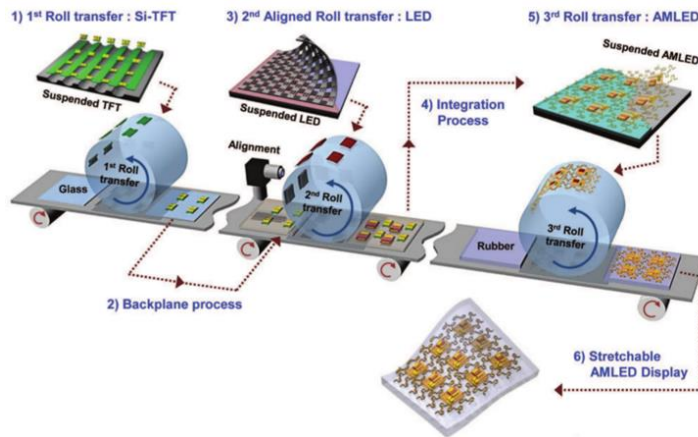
Schematic of a multi-roller transfer printing process [27].
